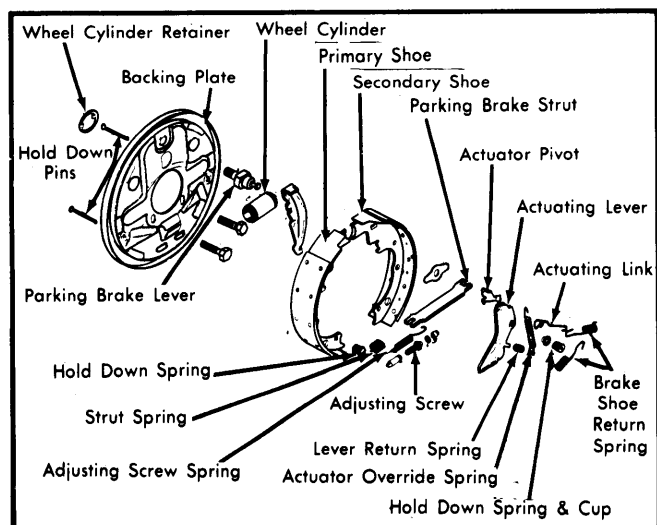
Exploded View of Rear Drum Brake Assembly (Century, Cutlass, El Camino, Grand Prix, LeMans, Malibu & Monte Carlo)
